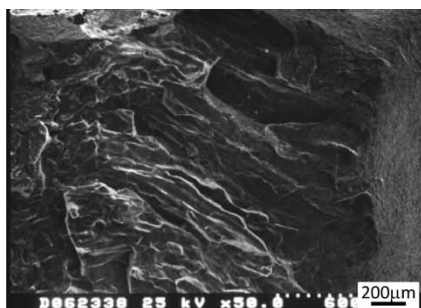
Fracture surface of Charpy impact test specimen at -40°C after PWHT
